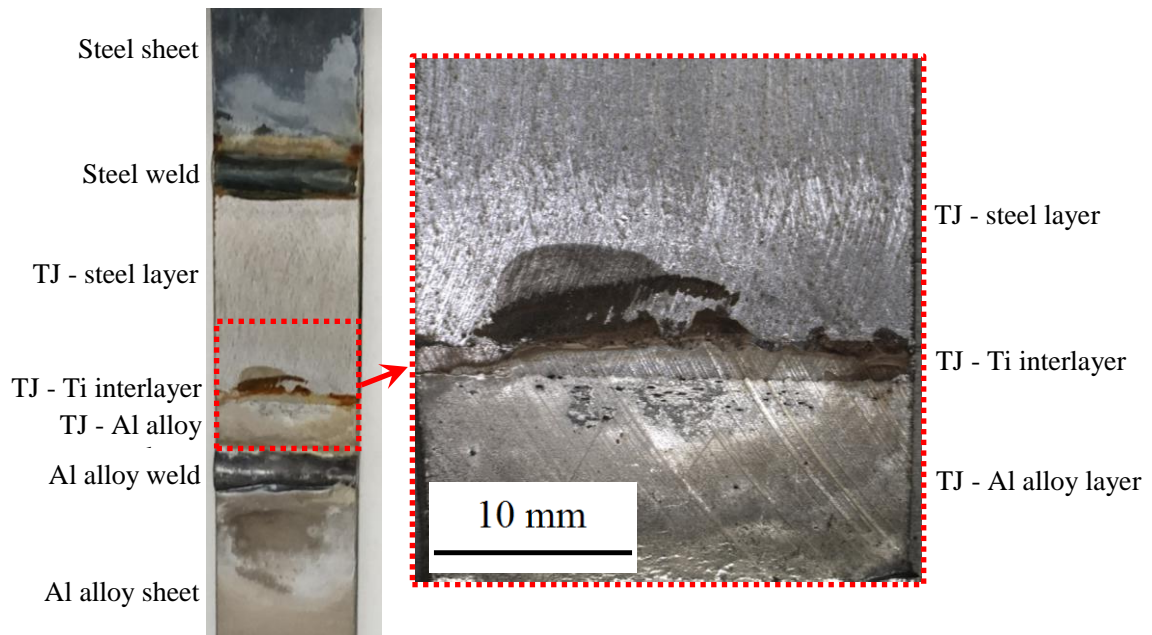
Type C hybrid joint specimen, after welding and corrosion. Detail of corrosion close to the weld planes of the Transition Joint (TJ). The specimen width is 25 mm.
